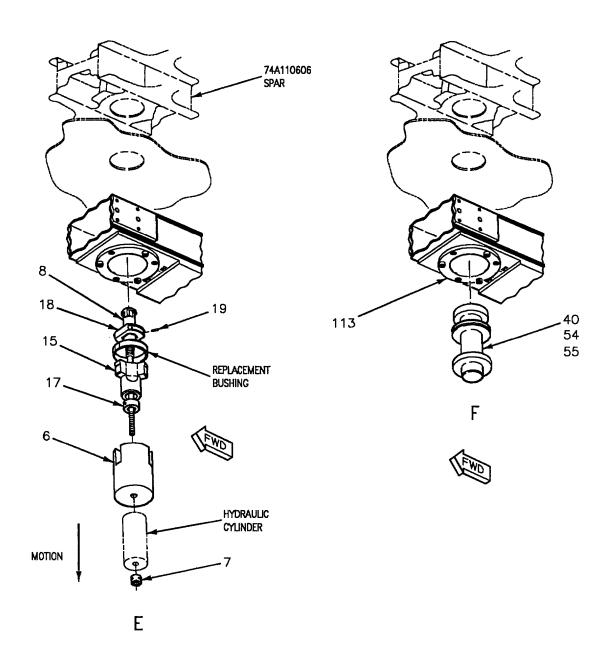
Boring Structure/Splice Fitting, Installation and Boring of Inboard Pylon Post Bushings (Sheet 4)
